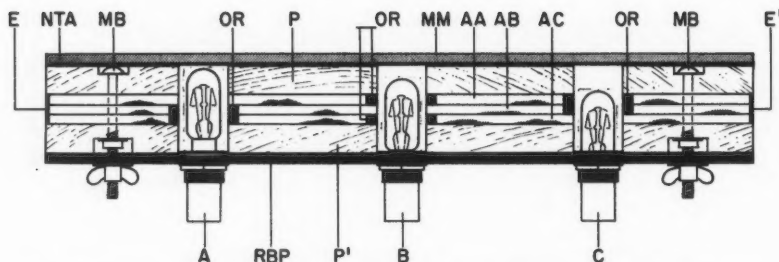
Sectional view of three-layer, three-lamp, animated exhibit. The positions of opaque rings OR (see legend to Fig. 8), assembly and mounting bolts MB, and lamps A, B, and C are clearly shown. The acrylic sheets are sandwiched between two panels, P and P'. Panel P has a window (not shown) through which the exhibit will be seen. Metal mask MM, which also has a window (not shown), covers the lamp holes in P. A neutral, smoke-tinted, transparent acrylic sheet, NTA, covers the whole front surface of the unit. If the front surfaces of metal mask MM and panel P' are painted black, nothing will be visible behind the smoke-tinted sheet NTA until the exhibit is in operation. The exposed outside edges of the three layers, E and E', and the larger holes in the acrylic sheets AA, AB, AC, made to accommodate the lamps A, B, and C, are all "sealed" as described in the text. The opaque rings OR may be cut from Bakelite or metal tubing. Their purpose is to protect "sealed" edges and to prevent all possibility of undesirable leakages of light from one layer to another. Lamps A, B, and C, although mounted on the same removable panel, RBP, have been positioned to provide maximum intensity of light to the layers they illuminate. The type of lamp holder shown provides easy adjustment. Other types may need adapting to suit given conditions.
